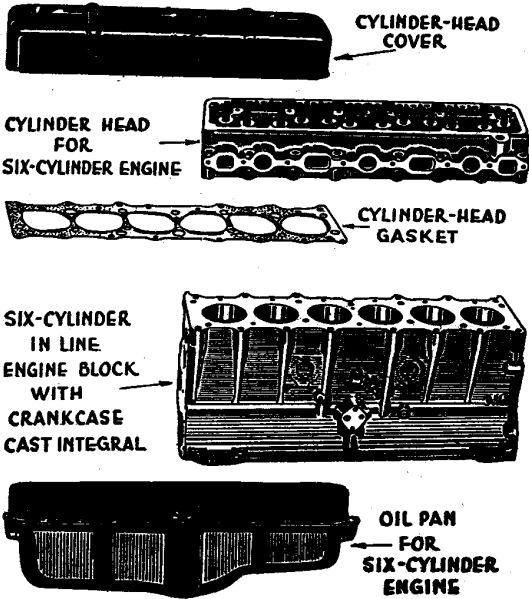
6 Cylinder in-line cylinder and crankcase casting and related parts.
